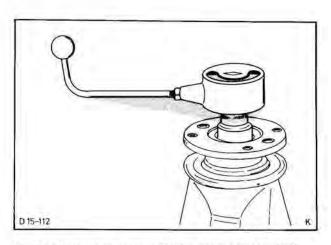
Check running torque of drive pinion using pre-load gauge 15–041
